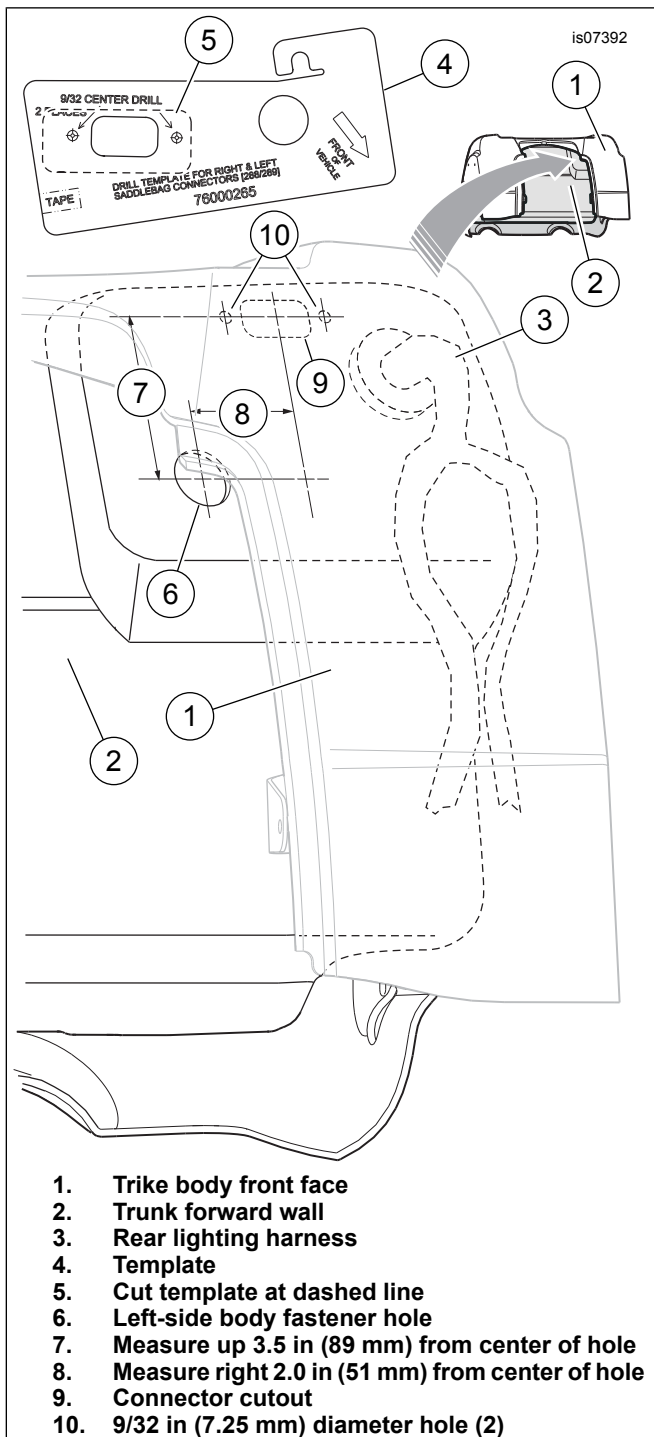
Trike Body Drilling for 12-Way Panel Mount Connector
